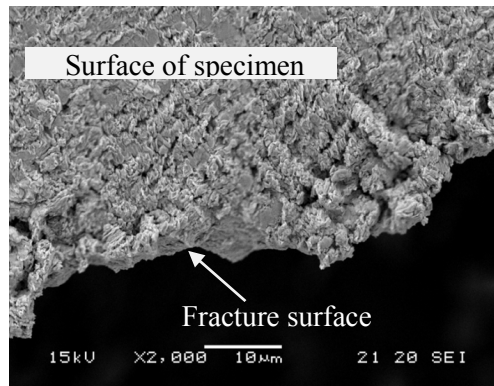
Scanning electron micrograph of fracture surface of Gold foil after fatigue fracture.
